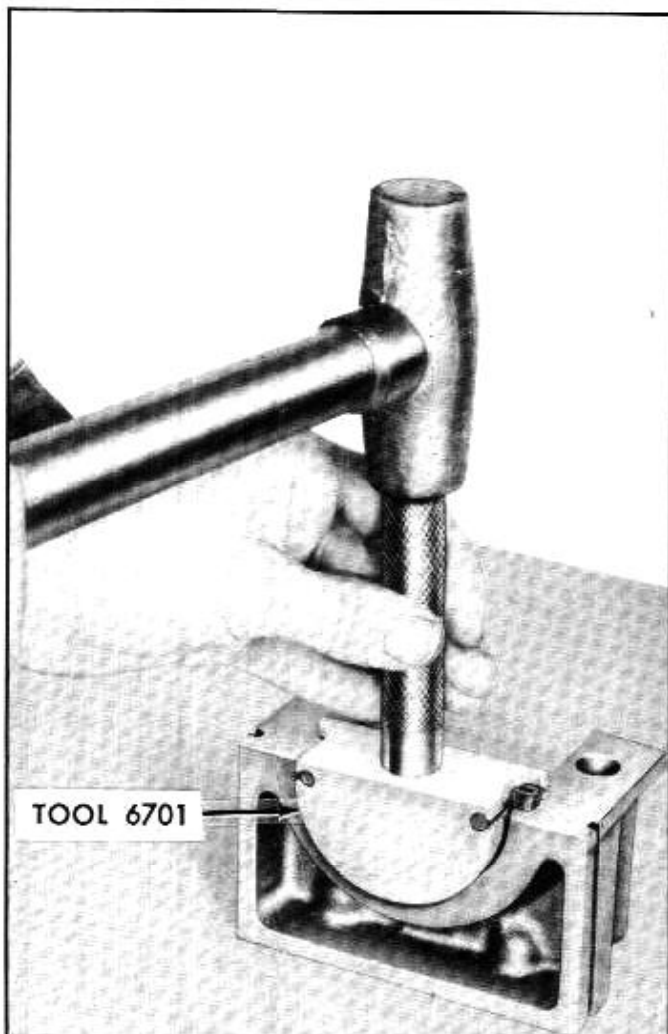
C-140—Installing Crankshaft Oil Seal in Rear Main Bearing Cap
